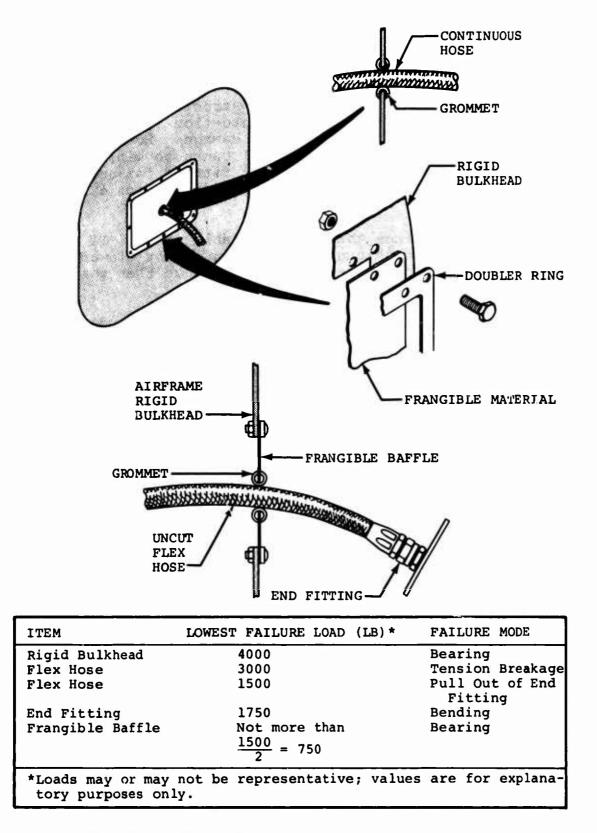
Hose Stabilizing by Bulkhead Frangible Panel.
